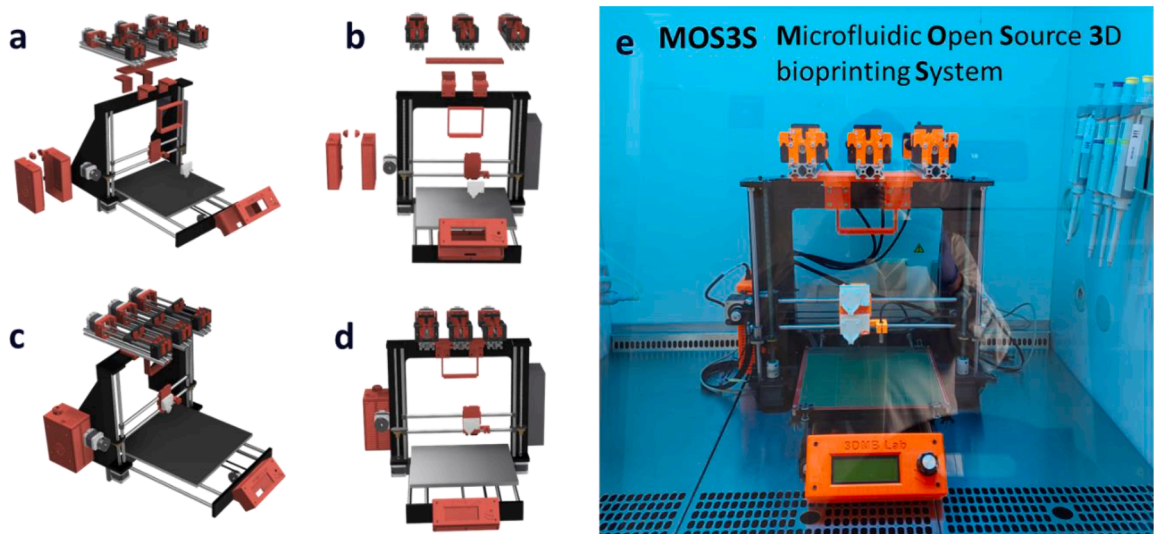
Render imaging of the developed 3D bioprinter: (a) side view of exploded, (b) front view of exploded, (c) side view of assembled, (d) front view of assembled and (e) Microfluidic 3D bioprinter, equipped with three 3D printed syringe pumps, housed in a sterile cell culture hood (class II).
